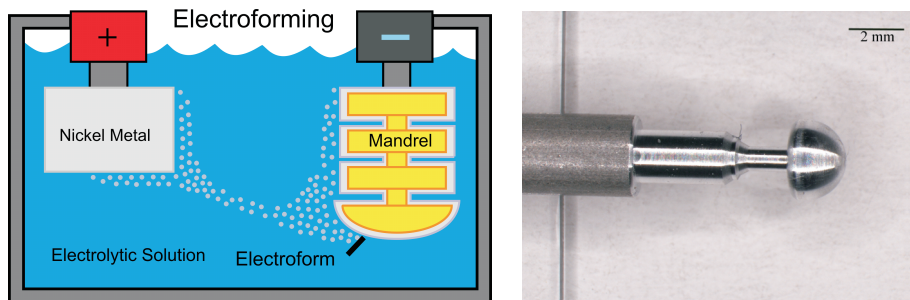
Principle of electroforming (left) and a turned geometry in aluminium to be used as stencil for electroforming.
